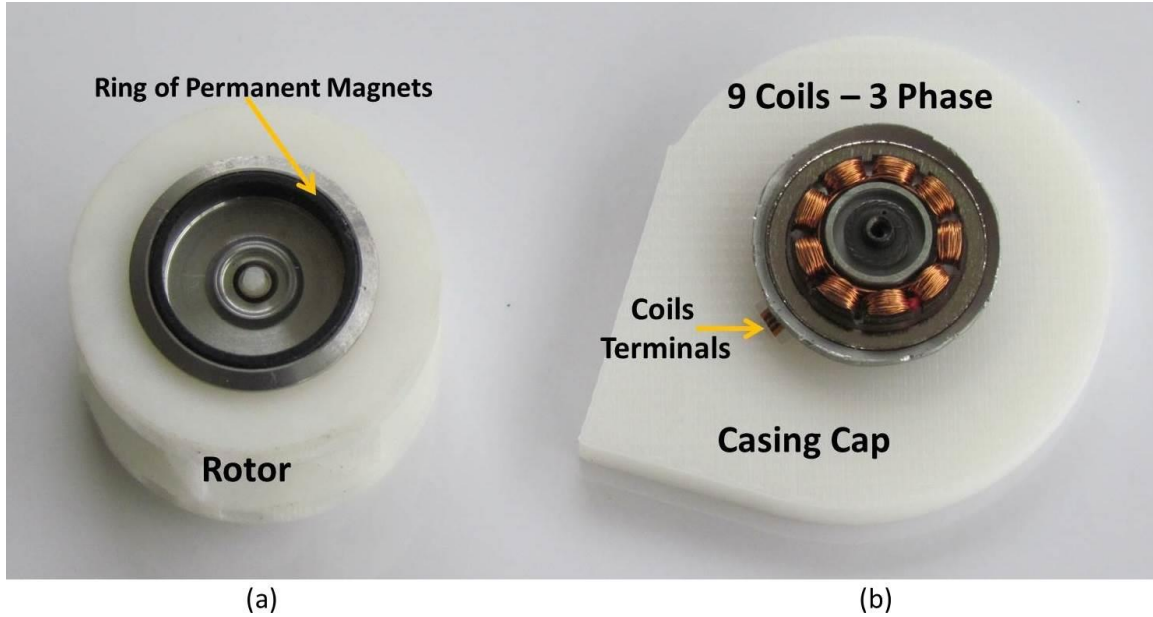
Ring of permanent magnets and coils assembled and bonded, on rotor and the turbine casing cap.
